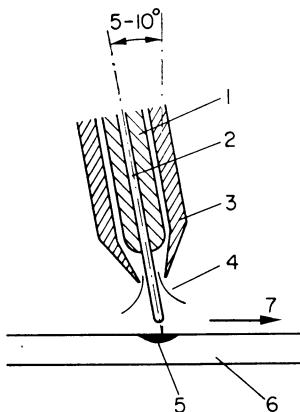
Electrode for inert arc welding; (1) collet; (2) tungsten electrode; (3) nozzle; (4) inert gas; (5) molten pool; (6) work; (7) direction of travel of the electrode
